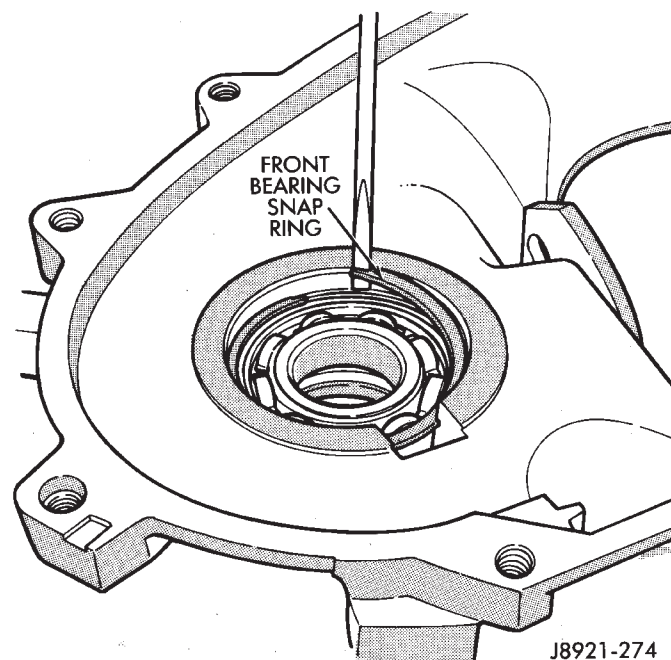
Front Output Shaft Front Bearing Snap Ring Removal
